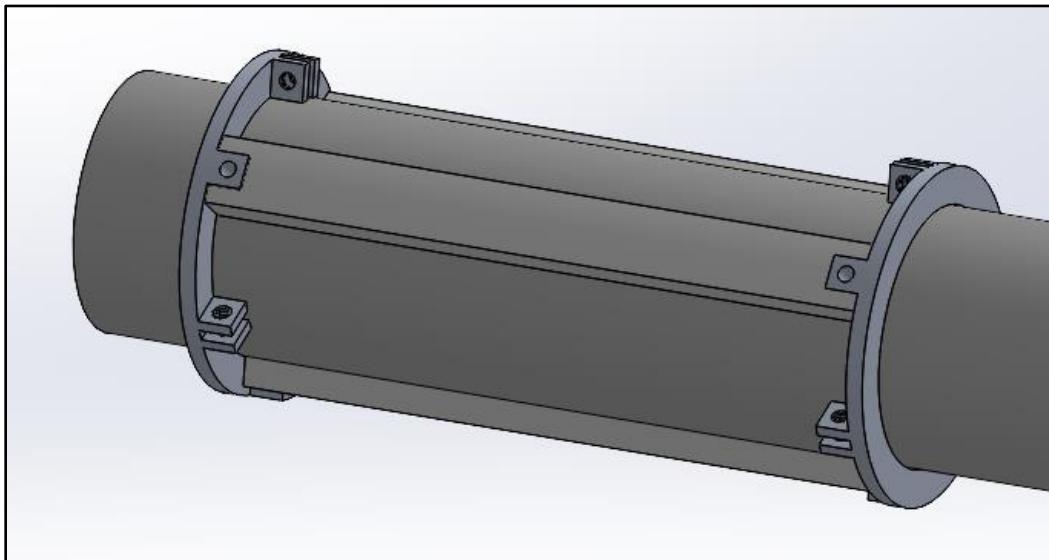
Motor Retainment Flange Assembly with Centering Rings and Motor Tube.
